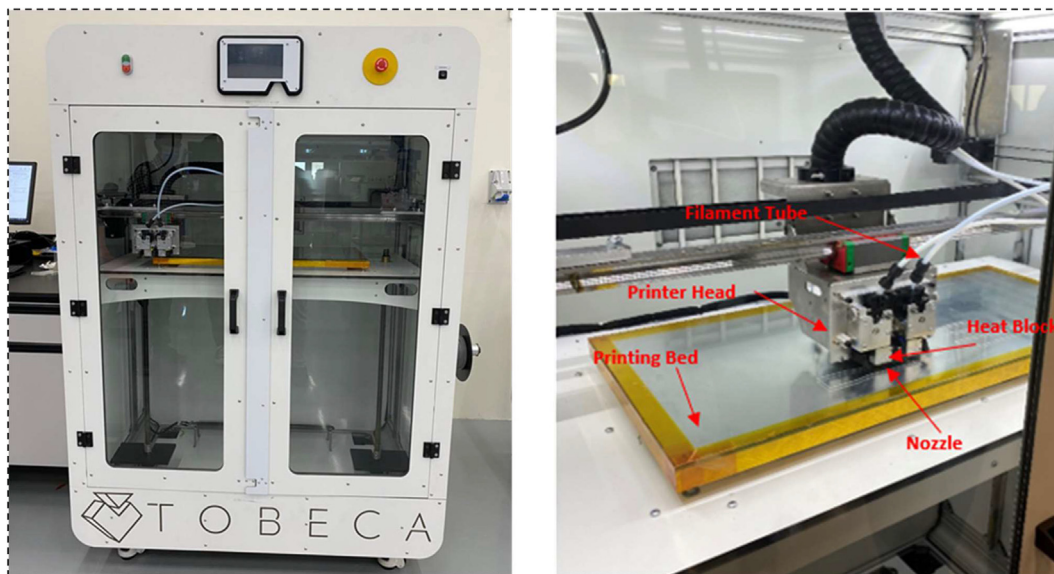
TOBECA 3D printer used to fabricate the 3D Printed specimens. Sliced models of the tensile specimens designed in AUTOCAD.
